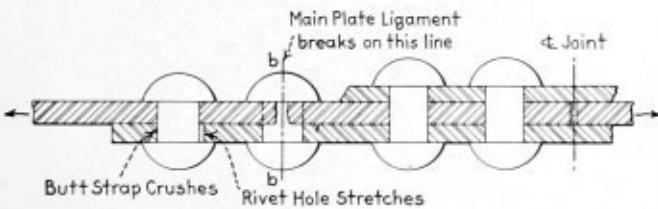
Failure of Double Butt Strap Joint Through Second Row of Rivets; Failure (T + Crb)
